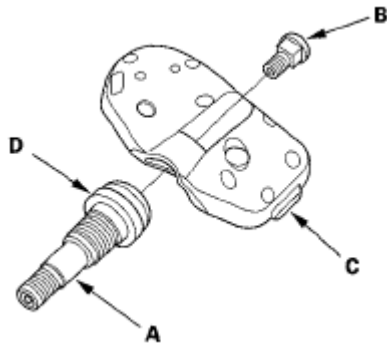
Identifying Valve Stem Grommet And Valve Stem (A), And Screw
